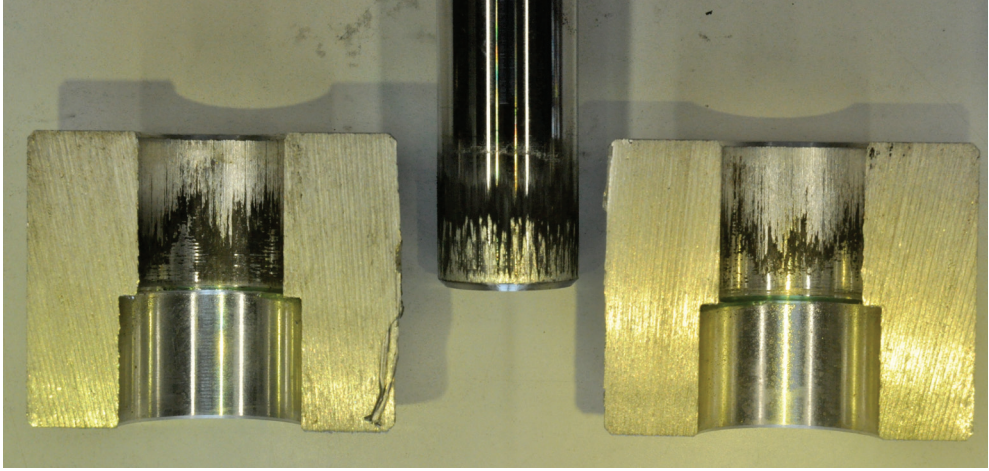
Example of fracture surfaces in *MHJ* (press-fitted and adhesively bonded): aluminium hub cut in halves and steel shaft.
